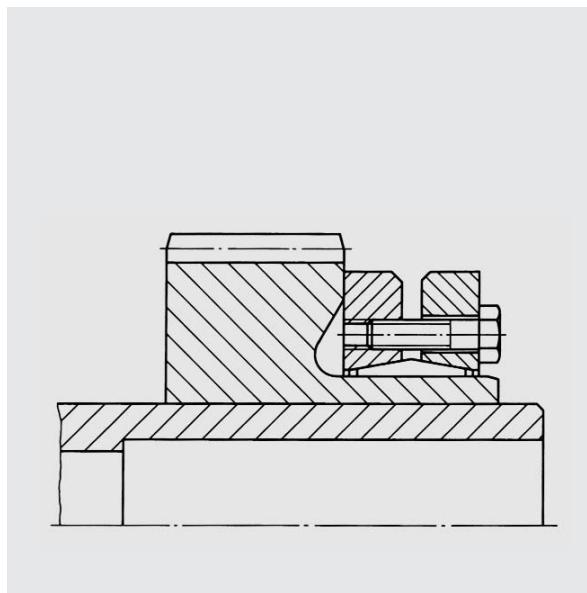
· RINGFEDER® Shrink Disc Adaptor flange type FK RAG
